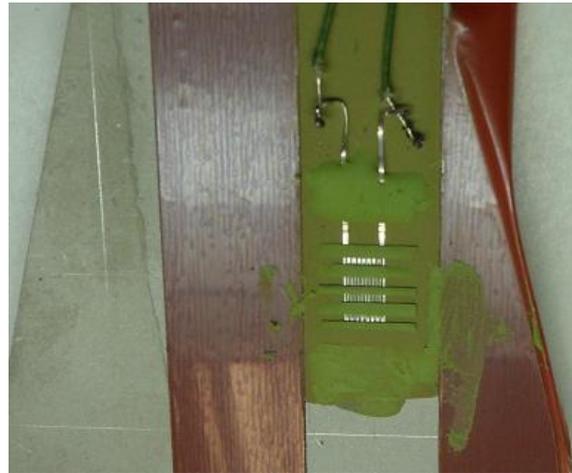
Welding of data signal acquiring wires to the extensometer grid terminals
